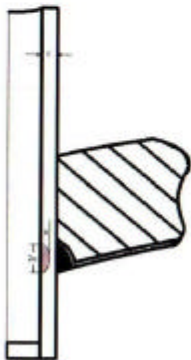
Inside, Axial Surface Flaws, At the Attachment Weld, Nozzle Uphill Side - Crack Growth Predictions
